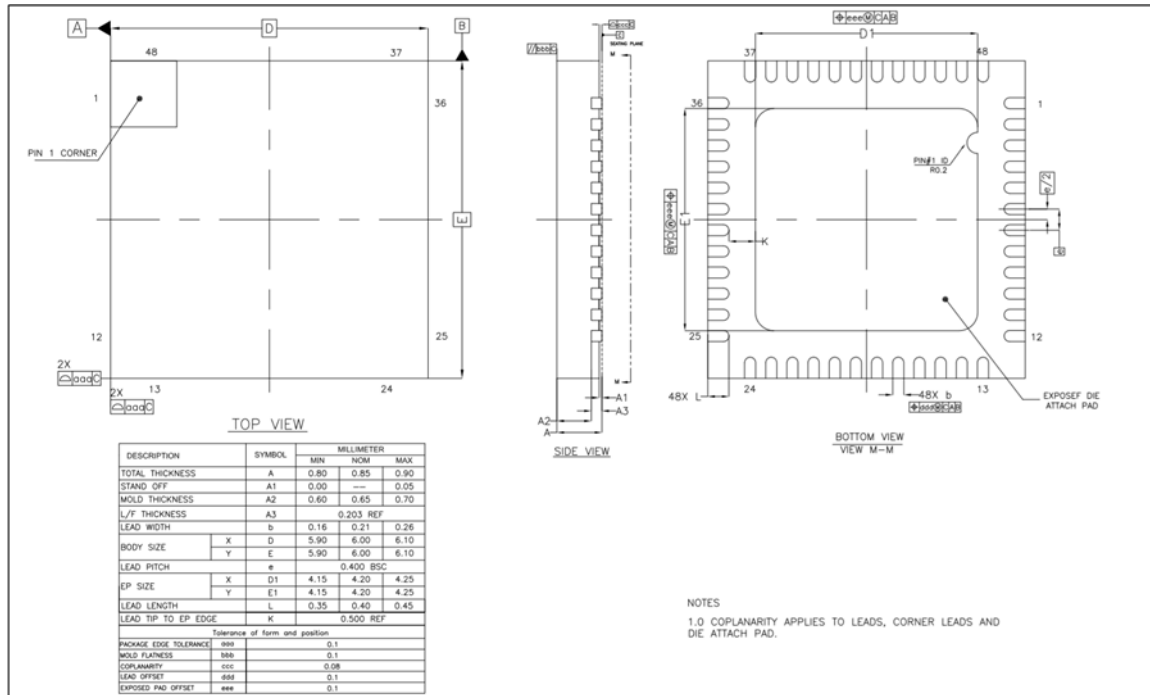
IN612L QFN48 6mmx6mm package outline drawing
